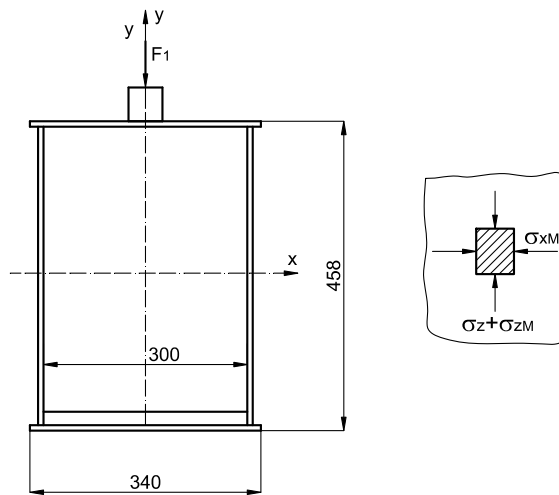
Cross section of the box girder with the presentation of stress states in the flange plate below the rail
